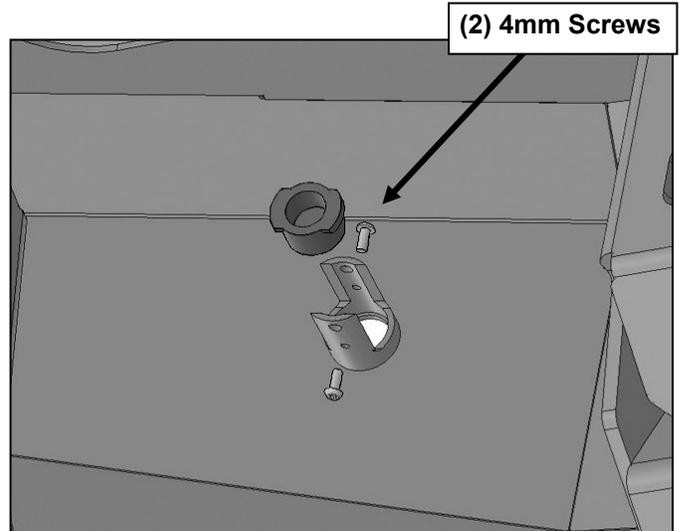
Reuse factory hardware to attach the passenger/right Frame Mounting Bracket
